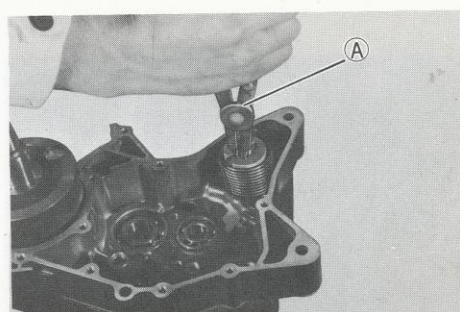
Remove circlip and spring guide by using special tool (A), (09920-70111).
